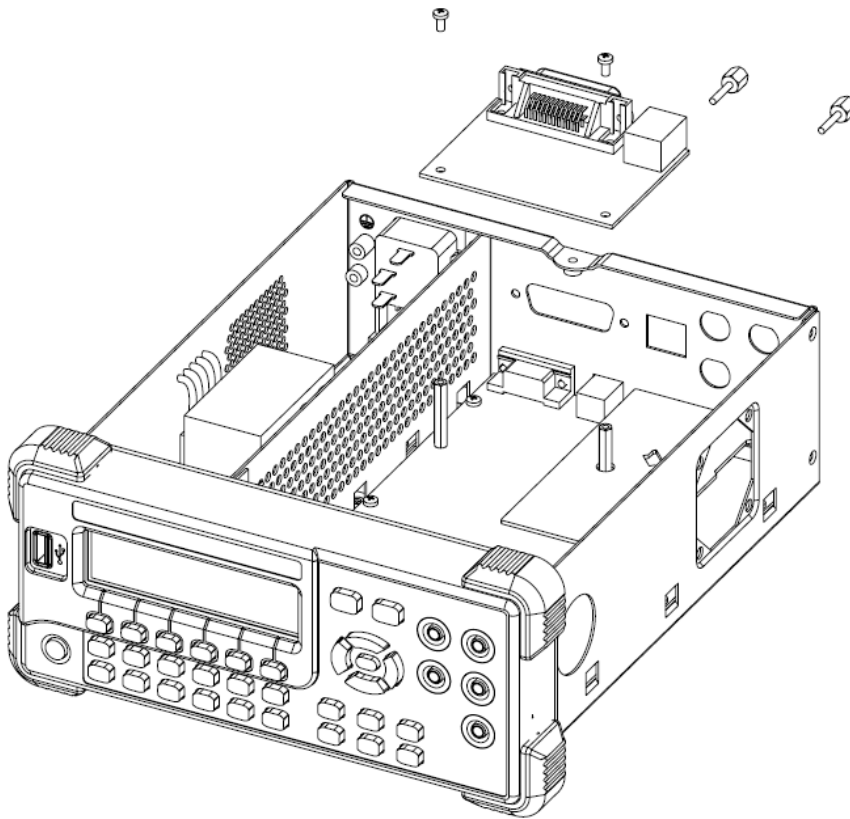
The Schematic of Disassembling and Assembling GPIB PCB
